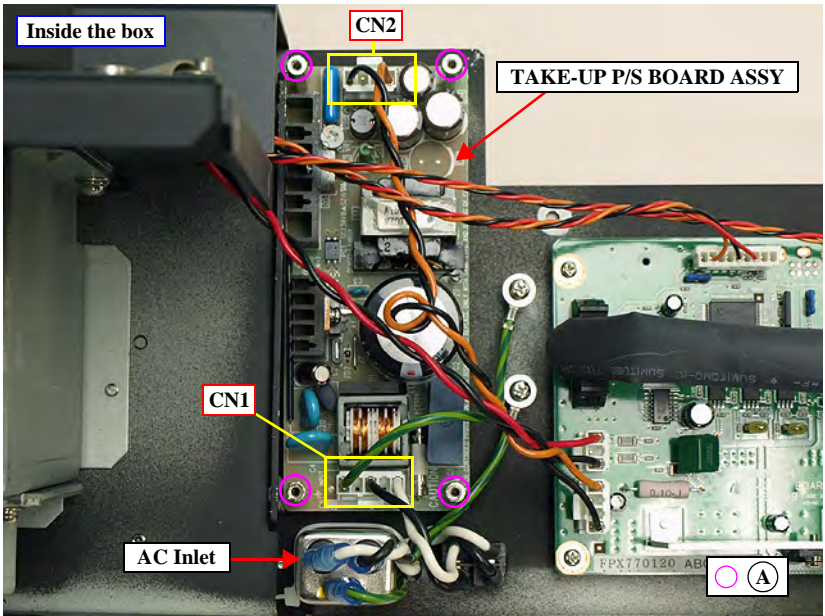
Removing the TAKE-UP P/S BOARD ASSY
